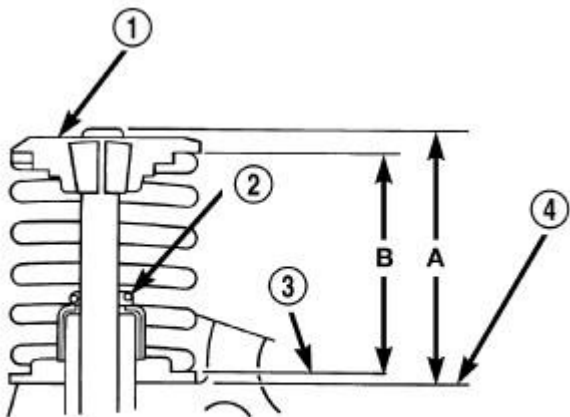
Checking Valve Tip Height and Valve Spring Installed Height
